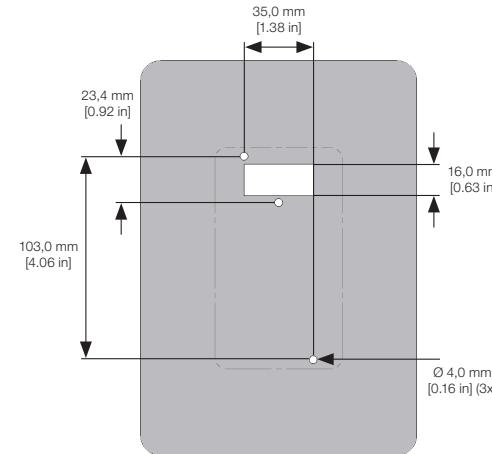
Dimensional for mounting the HMI without frame on a mounting plate or on a cabinet door
